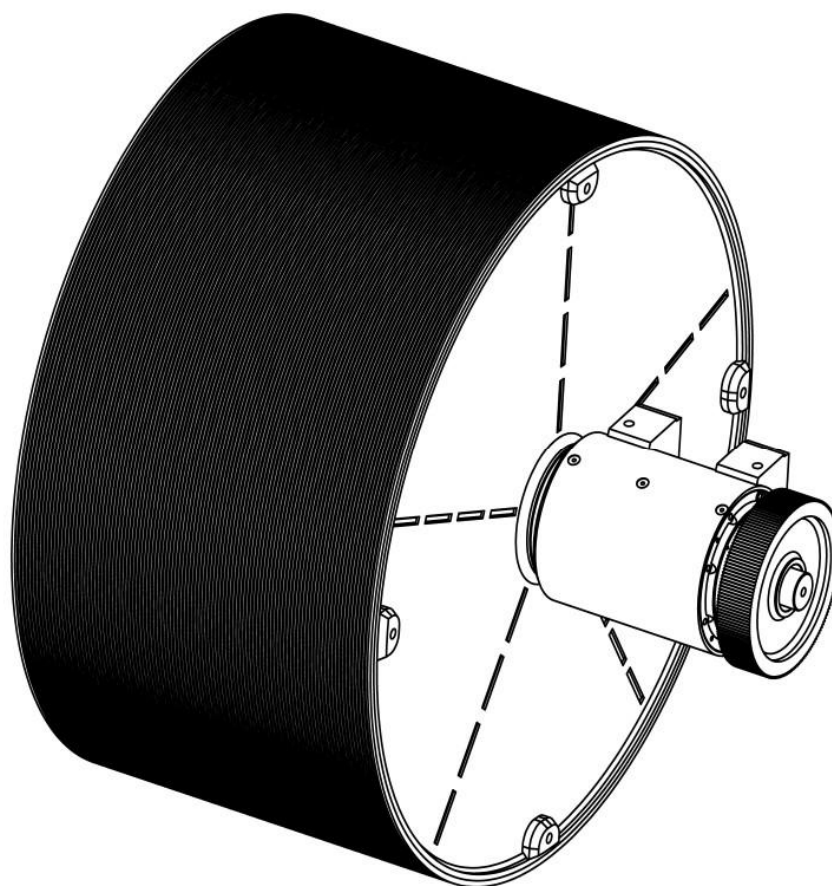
Detail of the engine drum unit, support and channels pulley
